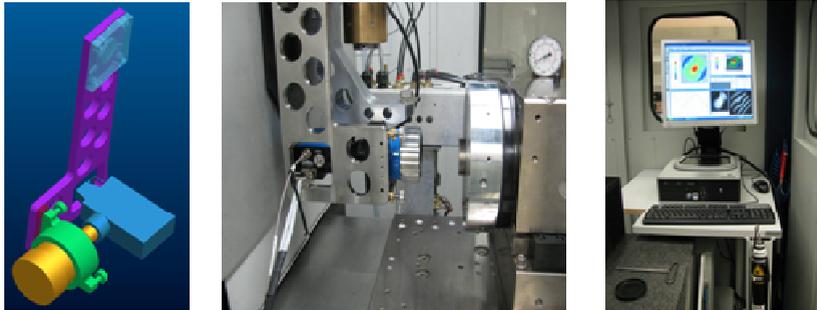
CAD-construction of interferometer-fixtured (left), setup within UP lathe (middle) and analyzing PC incl. support construction within machining cabinet (right)
